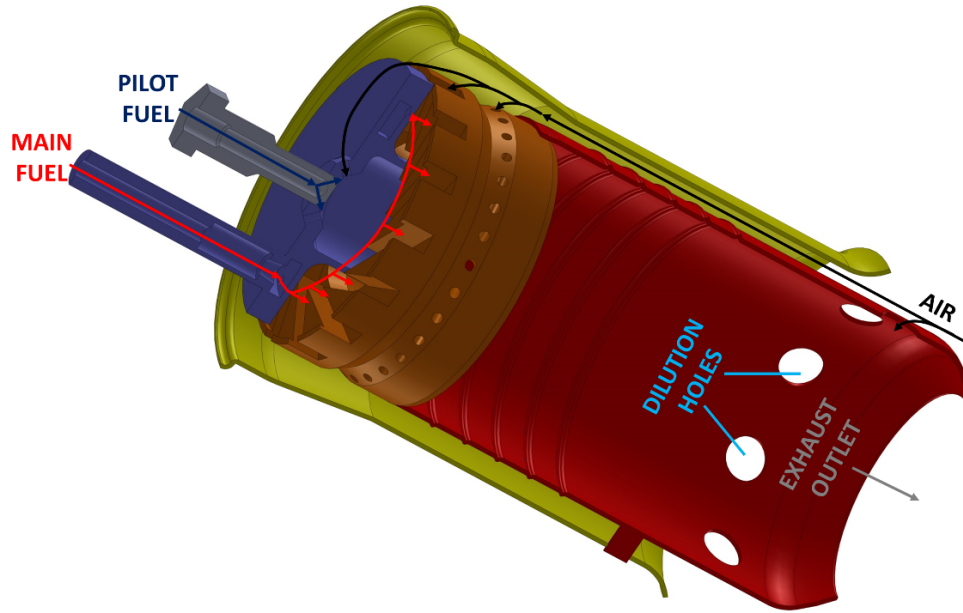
Section view of the CAD model for the Turbec T-100 combustor.
